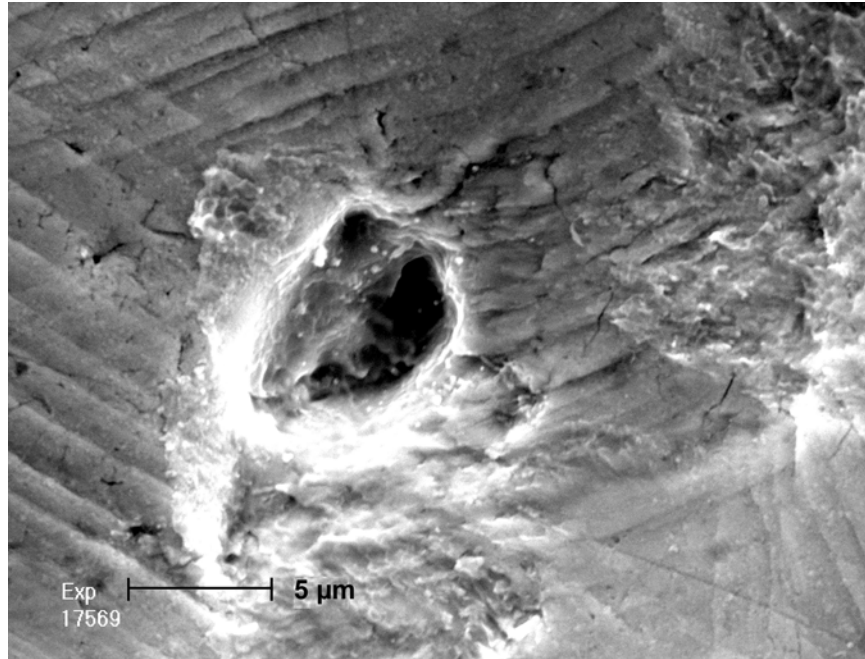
LE4 rear Kolsterised flange, heavily damaged region, crater.
